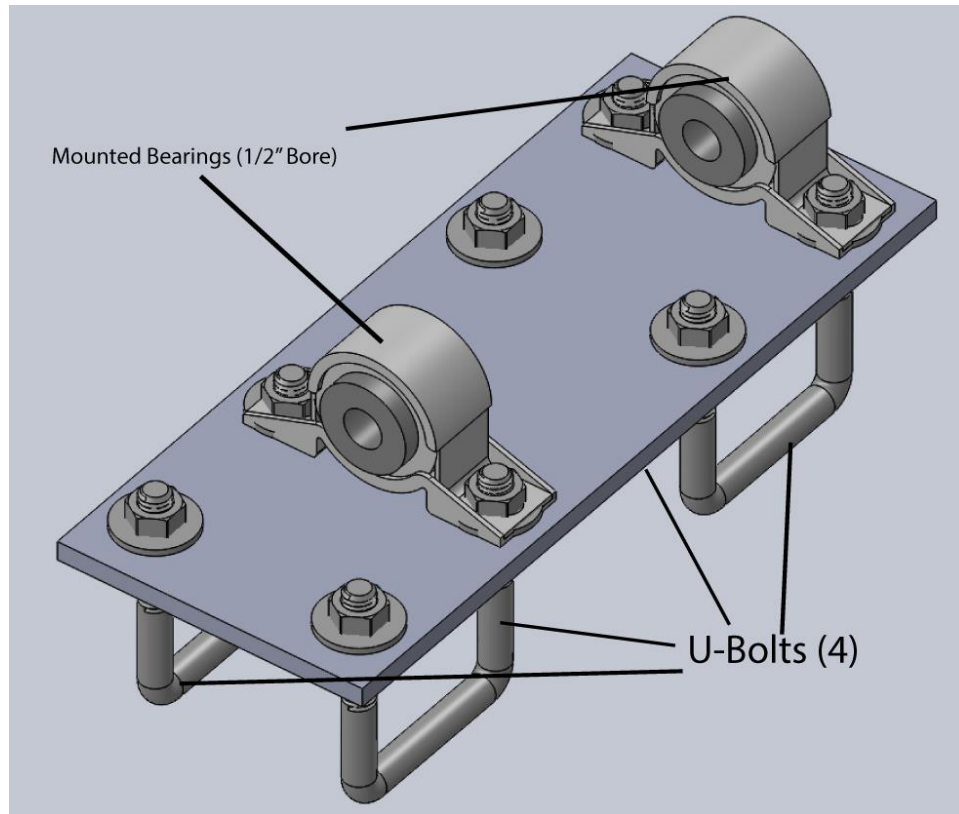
Intermediate Adjustable Shaft Assembly (no shaft shown).
